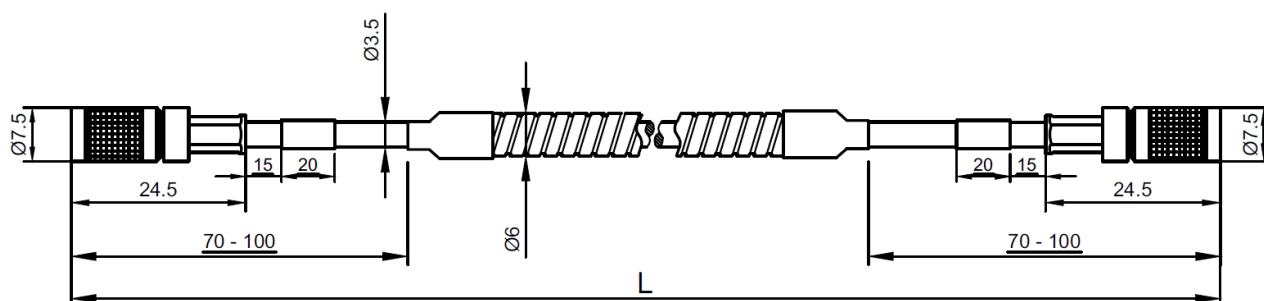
Dimensions of connection cable ds82x.ec102 (protective steel) mechanical reinforcement
